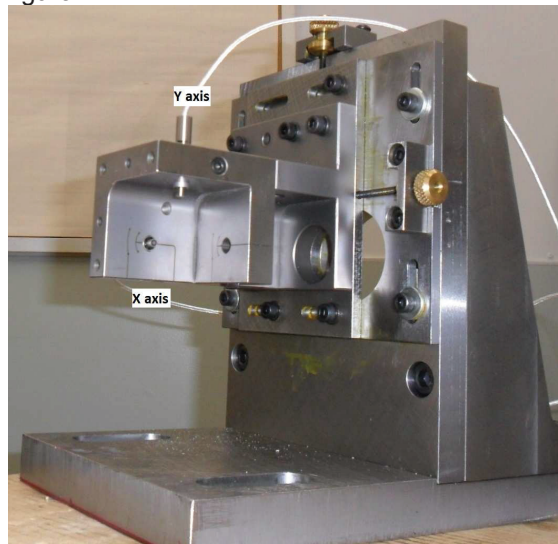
Run-in bench fixture used to hold the probe nest. Note the oversized steel plates used.
